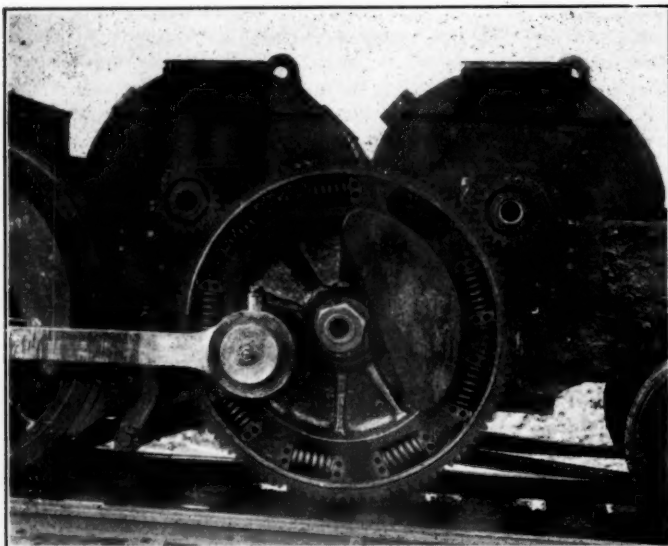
A Close Up View of the Jack Shaft with Its Spring Gear Meshing with the Two Motor Pinions
